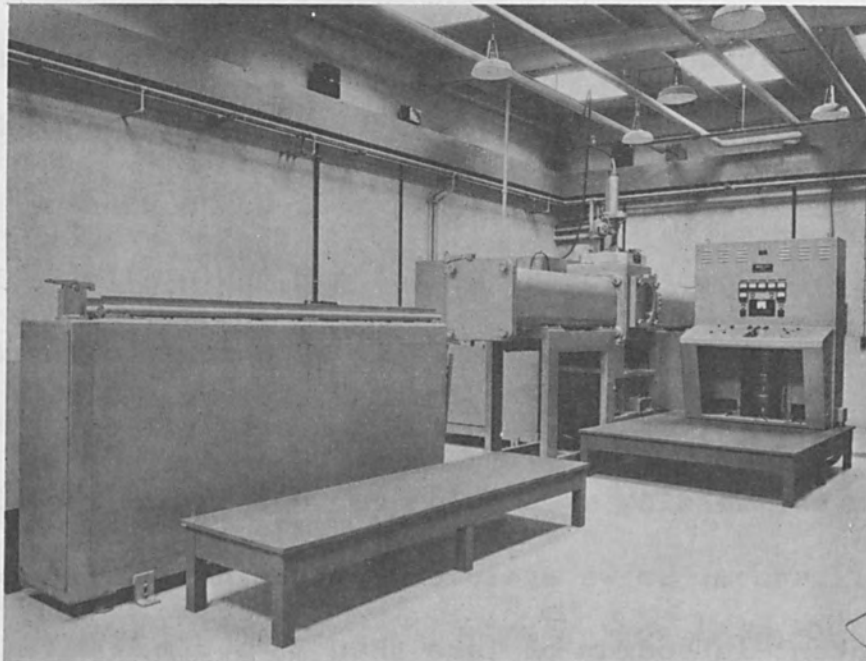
MACHINE USED FOR WELDING FUEL PLATES BUNDLE.
